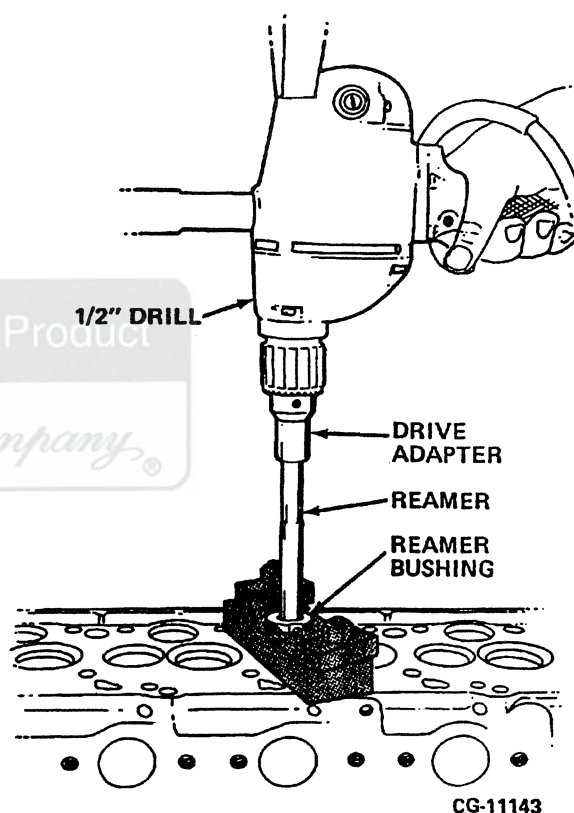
Reaming Valve Guide Bore in Cylinder Head
